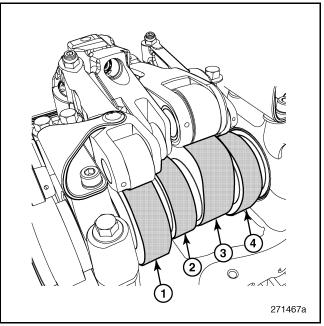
Camshaft and Rocker Arms (with PowerLeash™)
